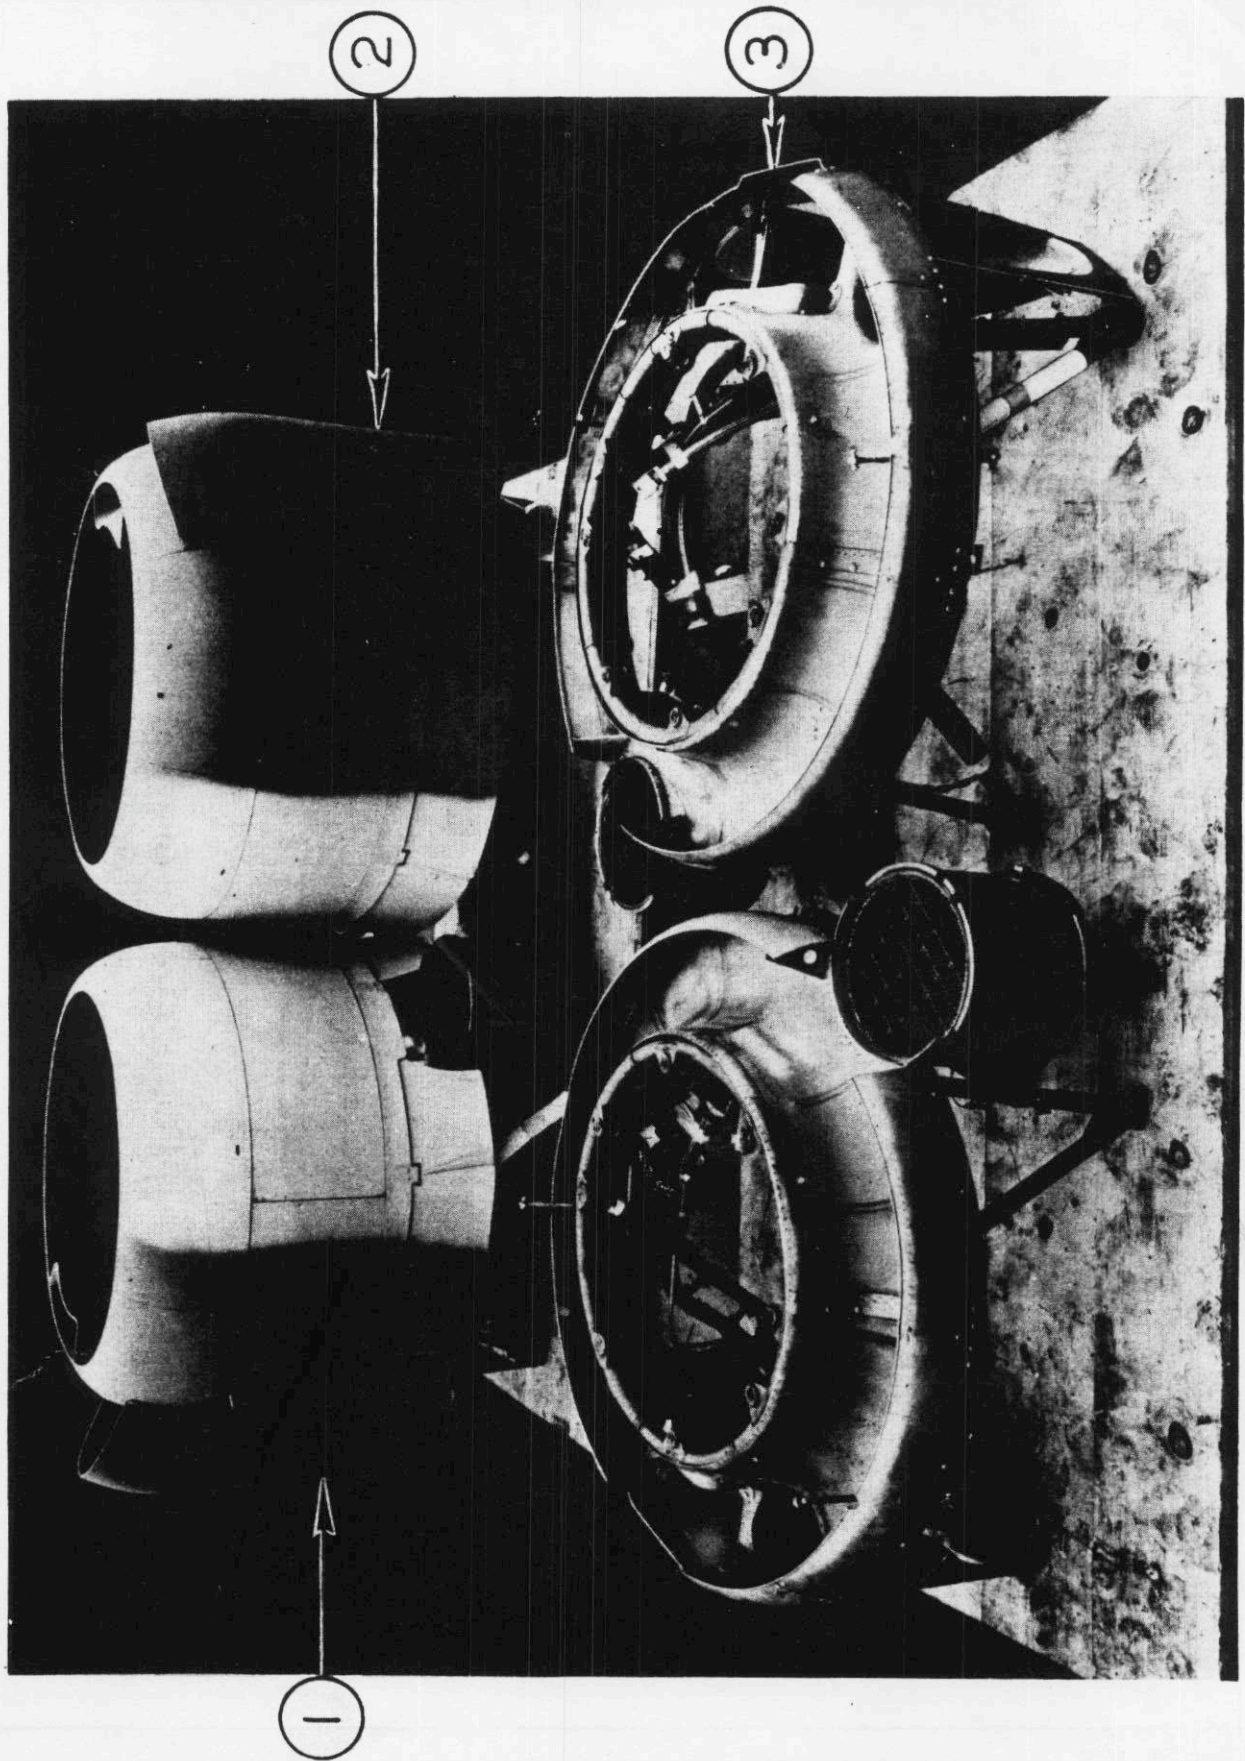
Quick Engine Change Unit—Cowling and Mount Assembly (See Page 213 for Index Numbers)
